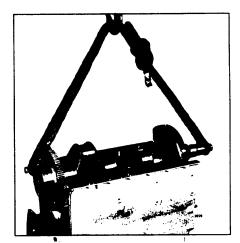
Lifting or Lowering Crankshaft from into Cylinder Block
